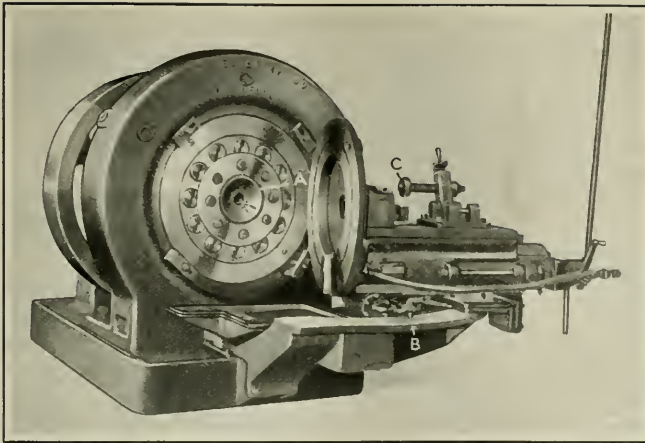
View of the Machine shown in Fig. 7 with the Roll Cover and Attached Feeding and Holding Devices swung back
